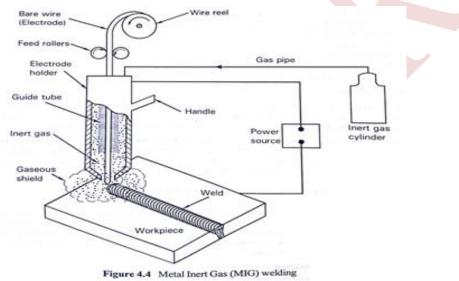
Metal Inert Gas Welding (MIG)
